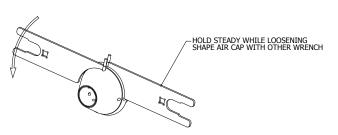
RPM-79 and RPM-80 Disassembly (30mm)
